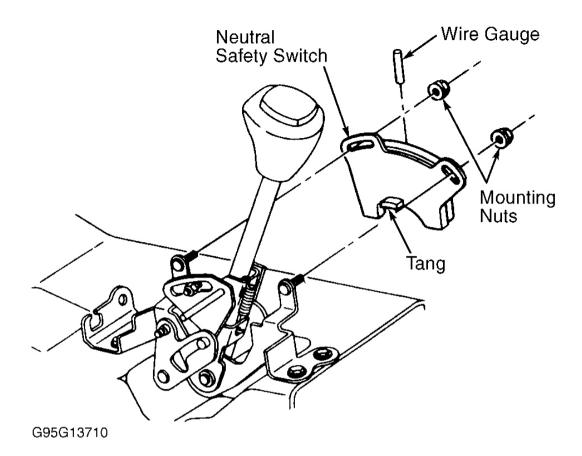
Adjusting Park Neutral Position (PNP) Switches (FWD) Courtesy of GENERAL MOTORS CORP.
